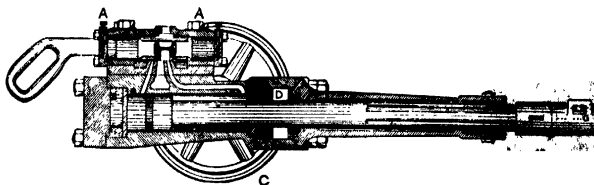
INGERSOLL-SERGEANT COAL-CUTTER.
